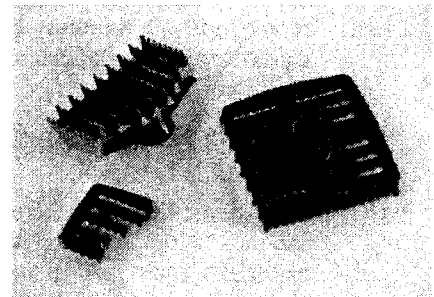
Original Casting and failed castings (courtesy of Cleveland Engineering Ltd)
